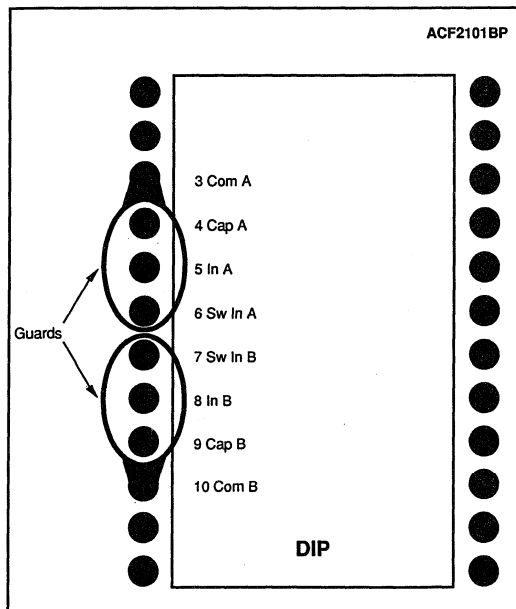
PC Board Layout Showing "Guard" Traces for Input, DIP. Both top and bottom of board should be guarded.
